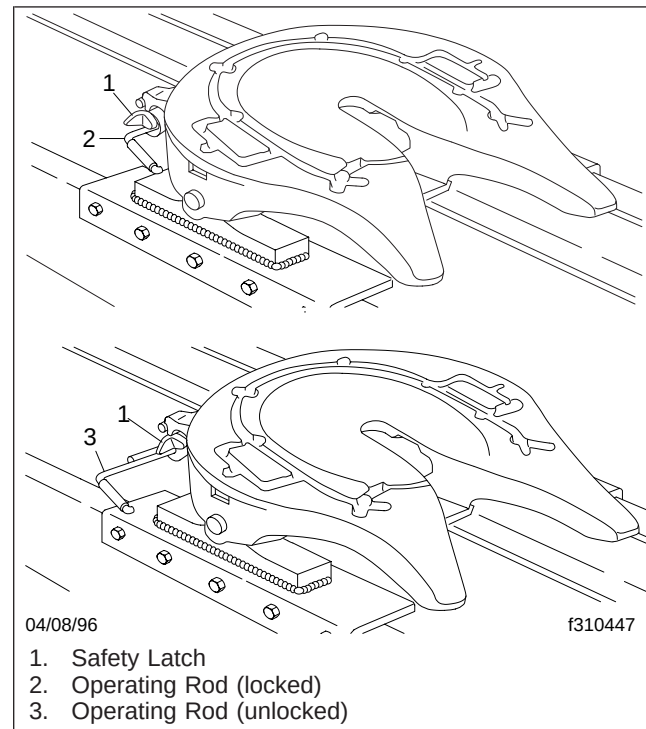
, Simplex Kingpin Locking Mechanism, Locking and Unlocking
